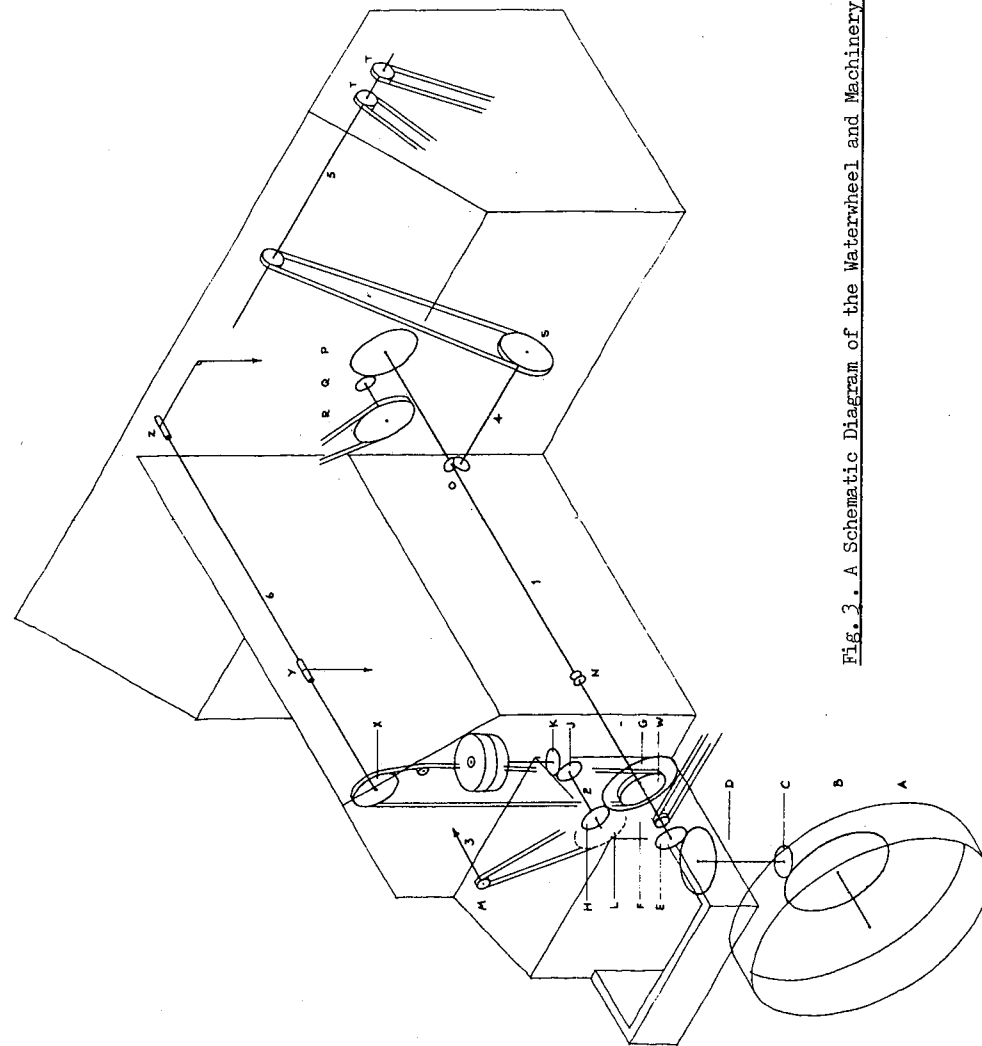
A Schematic Diagram of the Waterwheel and Machinery.
